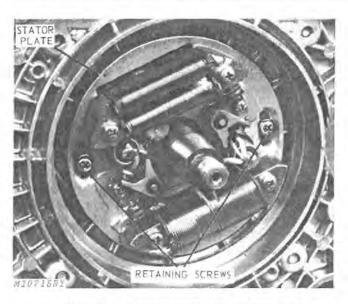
Rotating Stator Plate (Flywheel Removed for Illustration Purposes Only)
